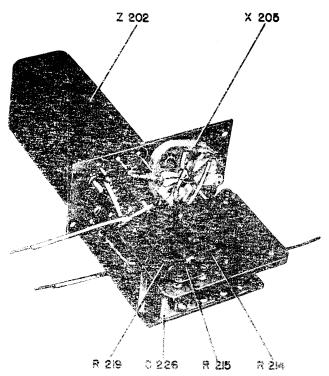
Receiver 2nd I-F Assembly - Bottom View
